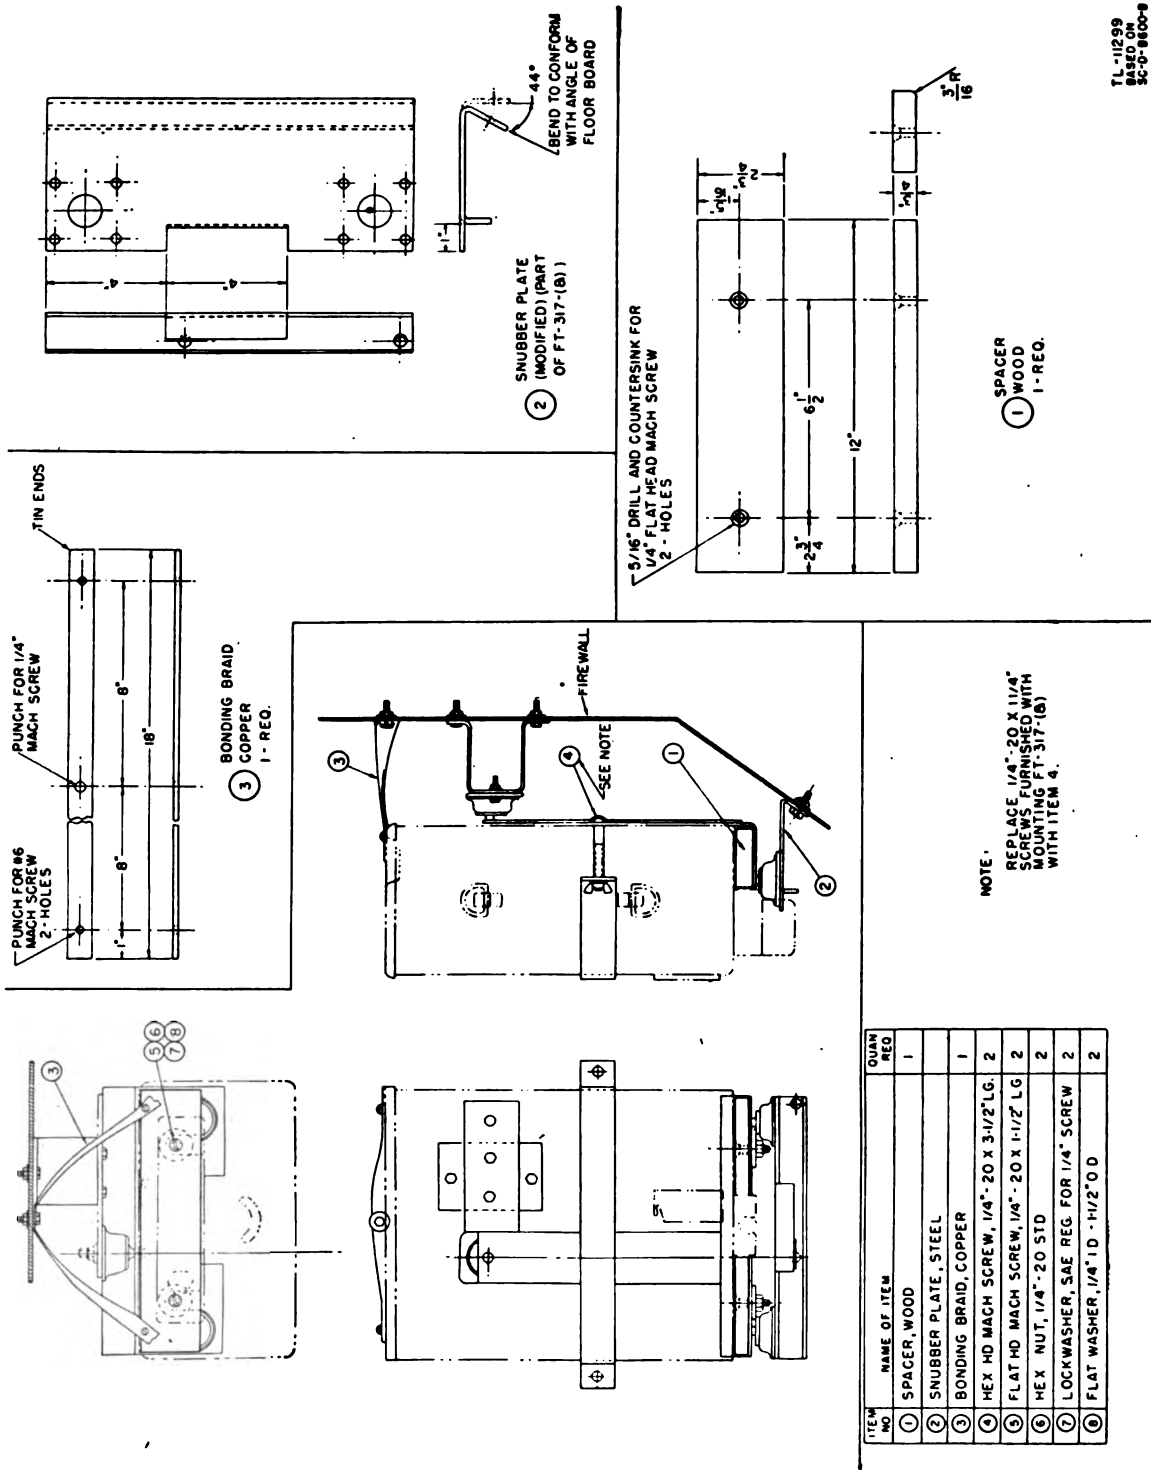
Modified Mounting FT-317-(B) for truck, 9 1/2-ton, 6 x 6, cargo, assembly and details.
